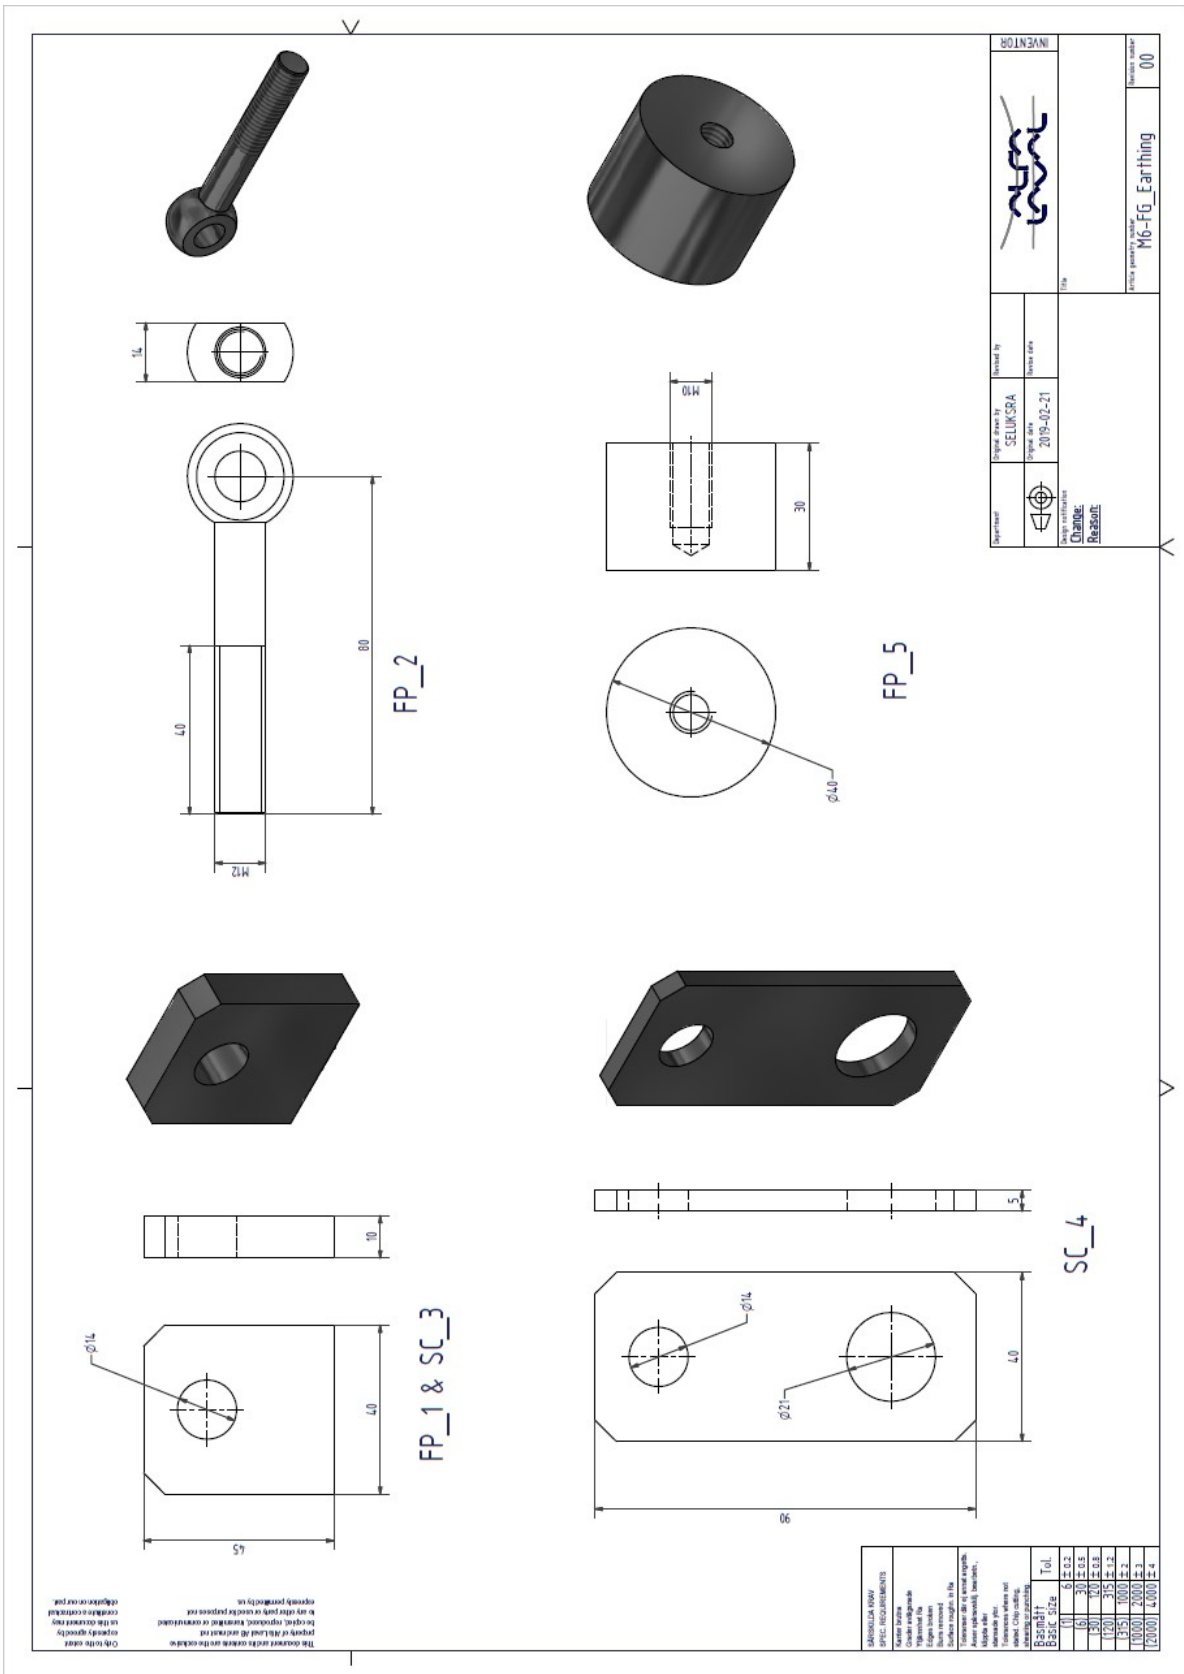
Component drawing. FP_1 and SC_3 are the FP weld and SC weld. FP_2 is the FP screw, FP_5 is the FP boss weld and SC_4 is the SC fastener.
